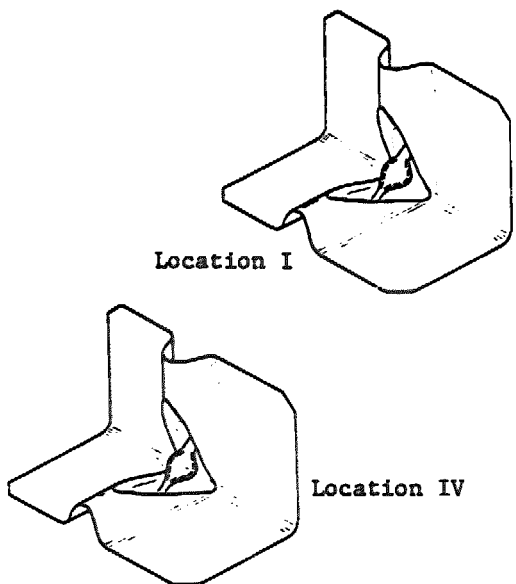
Angle Piece Fatigue Failure Locations
